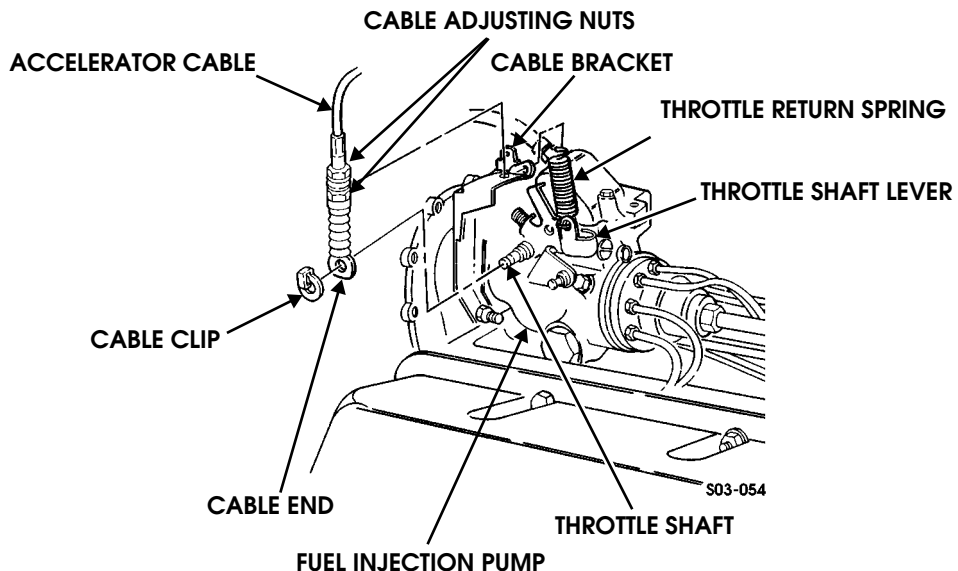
Throttle Shaft Lever Location (NA Diesel)
